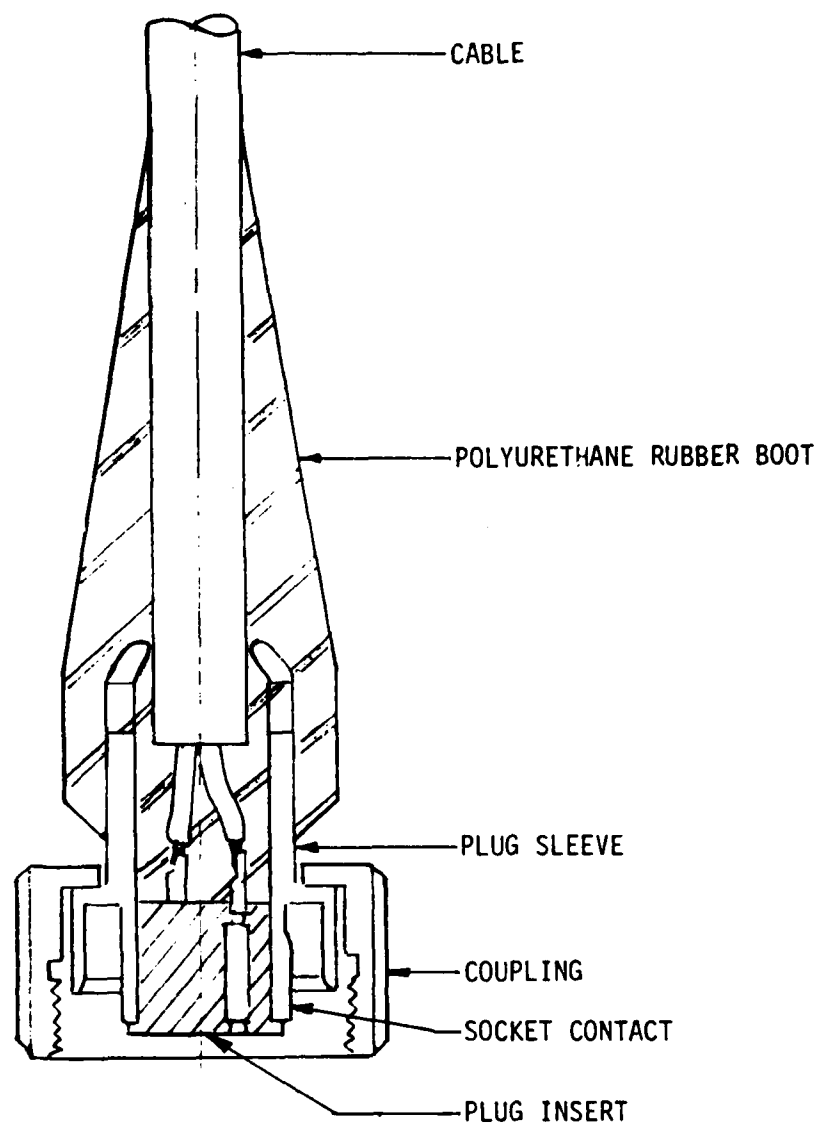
POLYURETHANE MOLDED MIL-C-24231 PLUG ASSEMBLY
